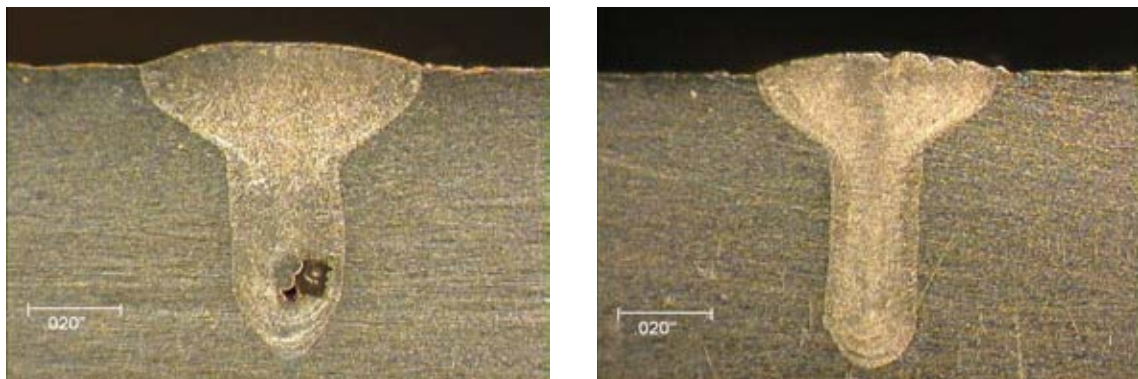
Welds using argon (left) and nitrogen (right) on stainless steel
